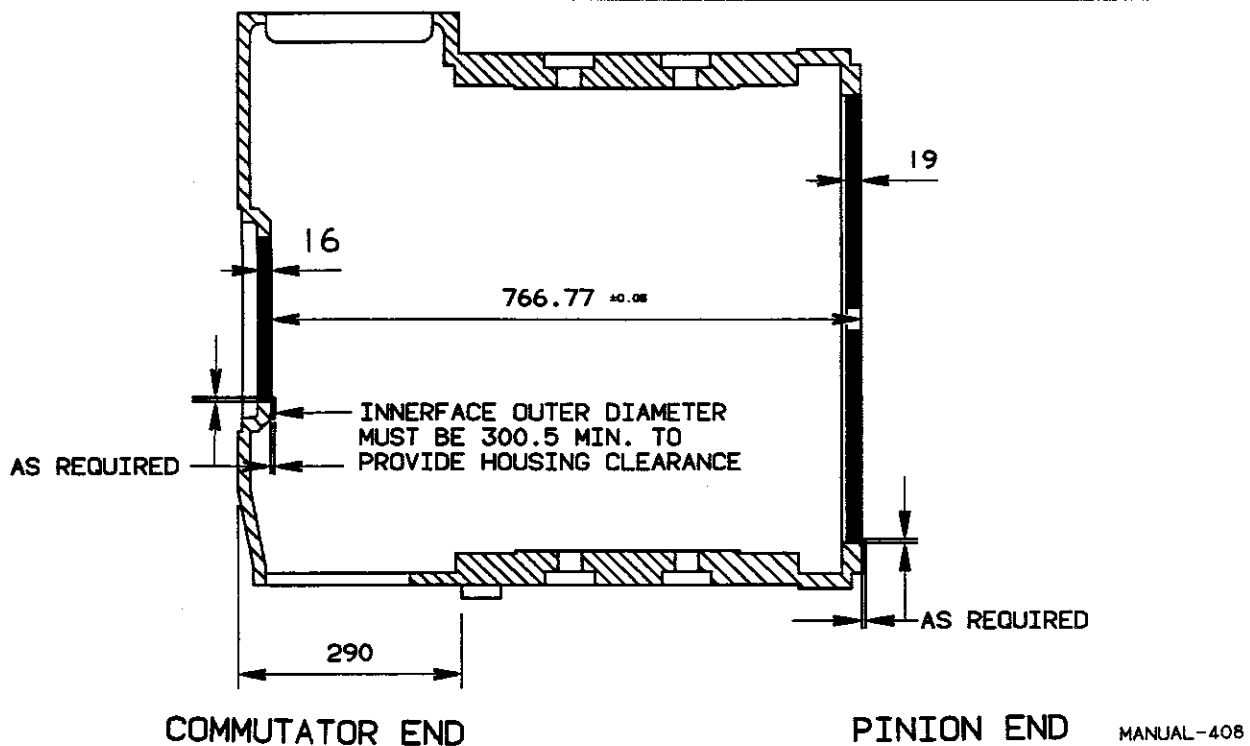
Pinion End & Commutator End Armature Housing Bor
